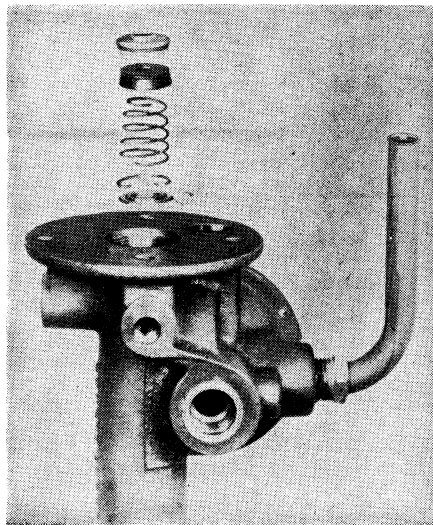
Replacing push rod guide and seal, rubber cup and spring (1st design)
